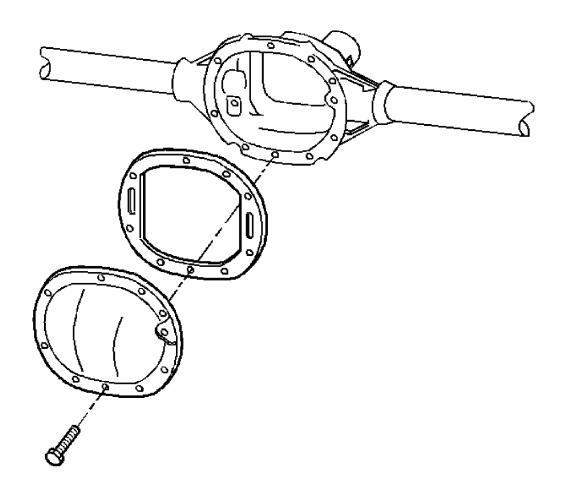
View Of Rear Axle Housing Cover & Rear Axle Housing Cover Gasket Courtesy of GENERAL MOTORS CORP.
